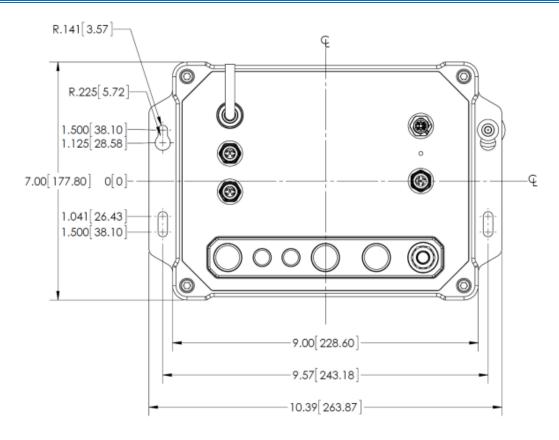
The 3520 Leak Test module dimensions in inches [mm] - front view
